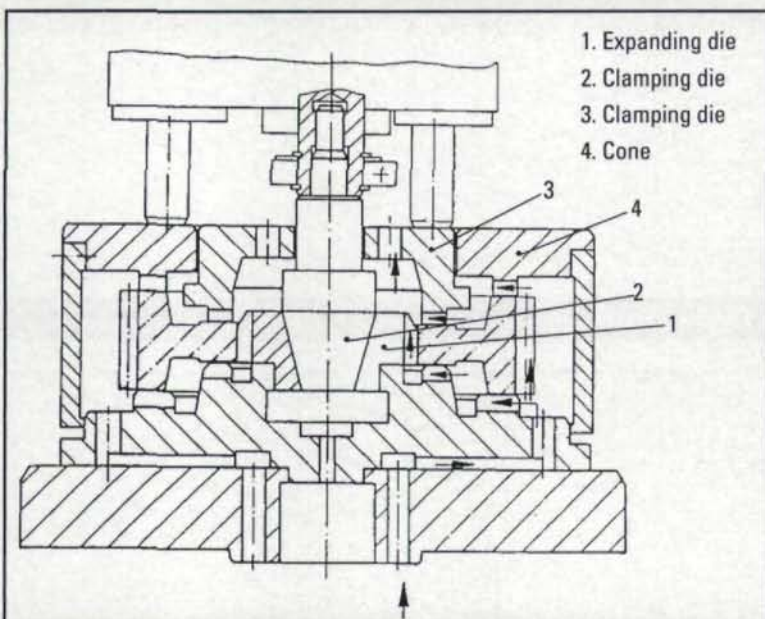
Quenching a cylindrical gear with special configuration. (Ref. Klingelberg quench press.)
